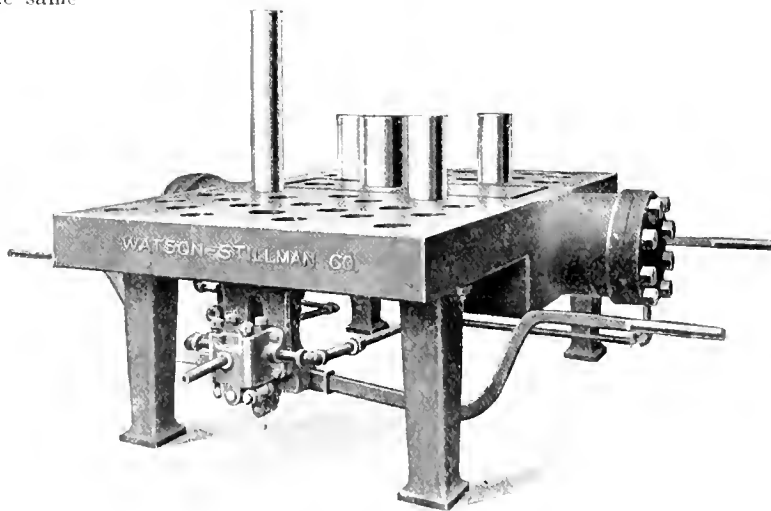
Watson-Stillman Bending Machine of Larger Capacity than that shown in Fig. 1
